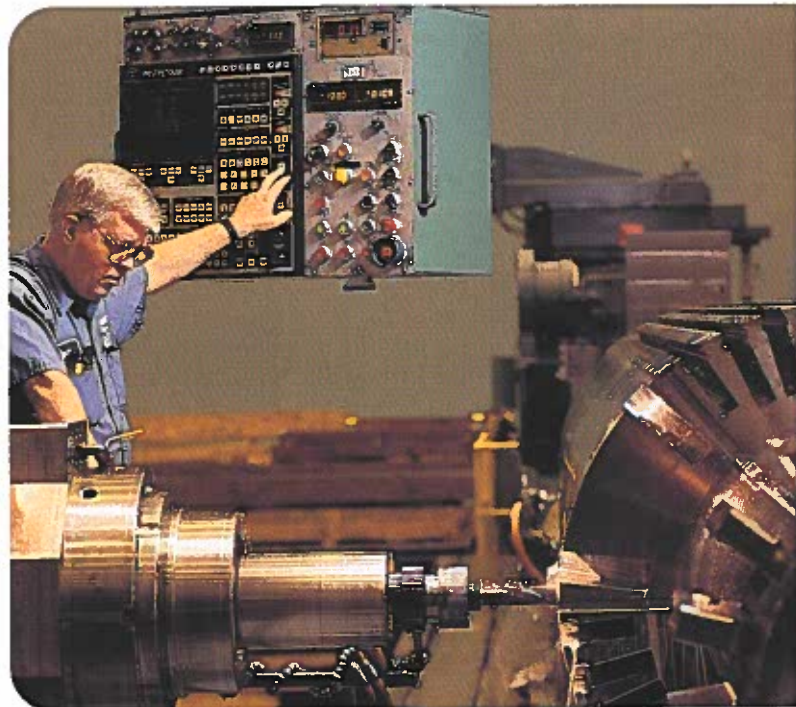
An automated machine does precision drilling. Drilling is which of the four processes?
